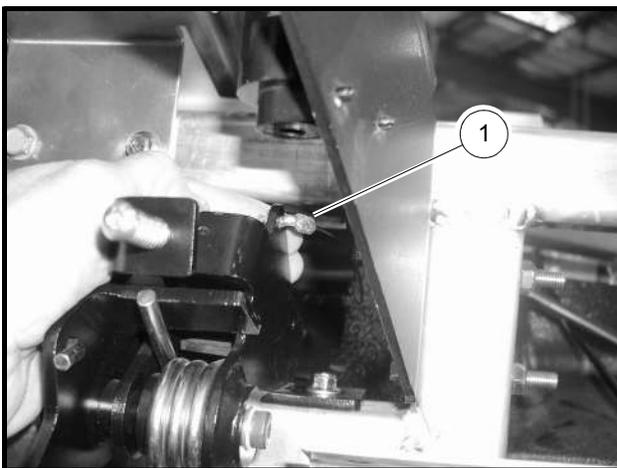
Z-Shaped Cable End – Gasoline Vehicles
